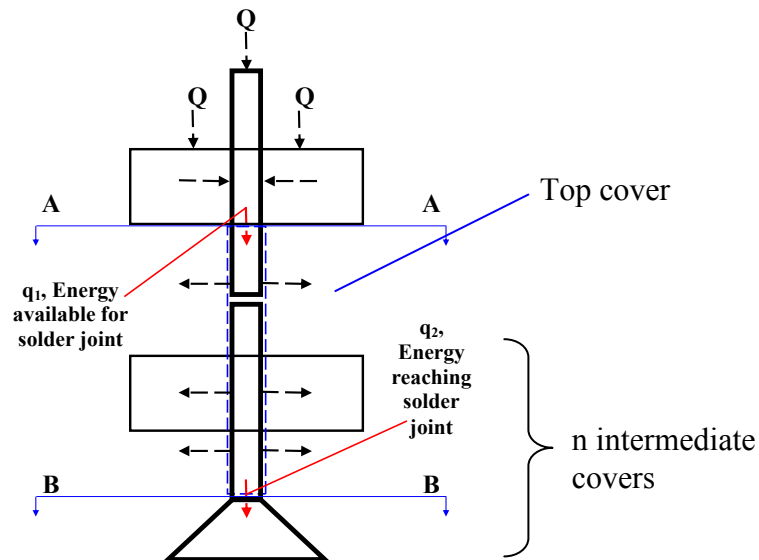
Schematic of multi covers PCB assembly showing the energy available for the solder joints and the energy reaching the solder joints.
